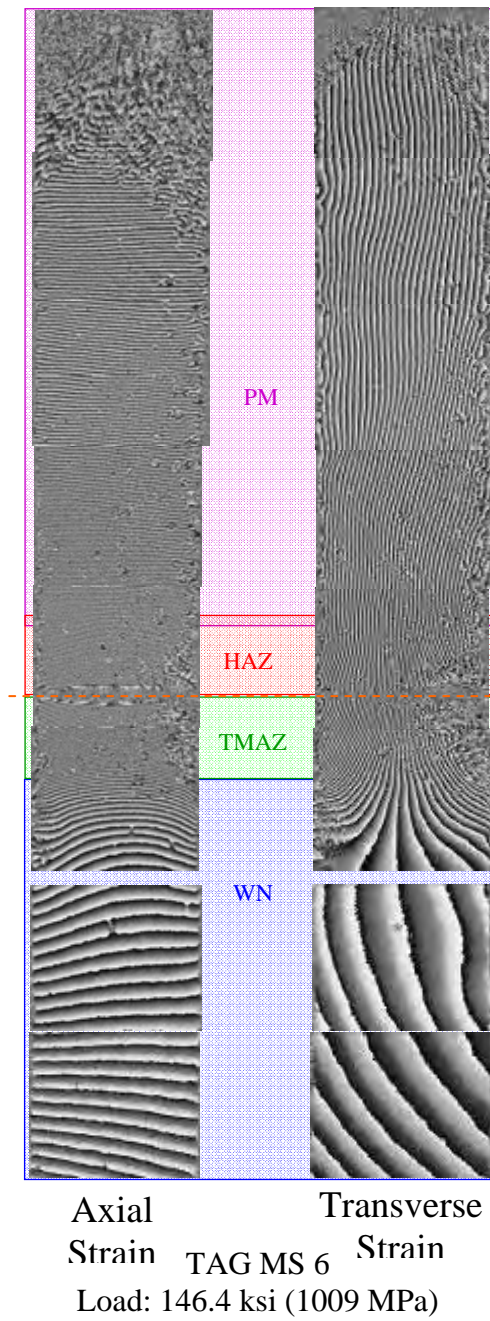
TAG MS 6 retreating side weld detail step 2
